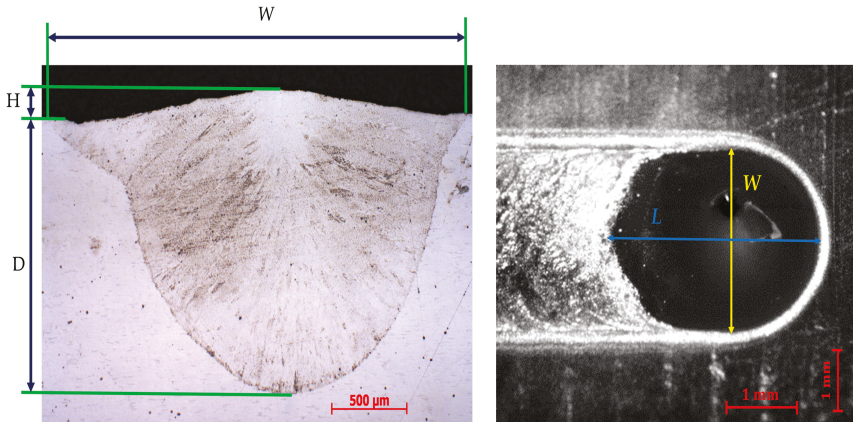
Morphology of the weld pool (316L): $1600 \text{ mm}\cdot\text{min}^{-1}$.
